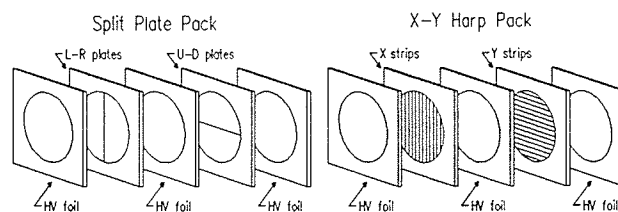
Assembly of the Split Plate and Foil Strip pack G10 frames.
